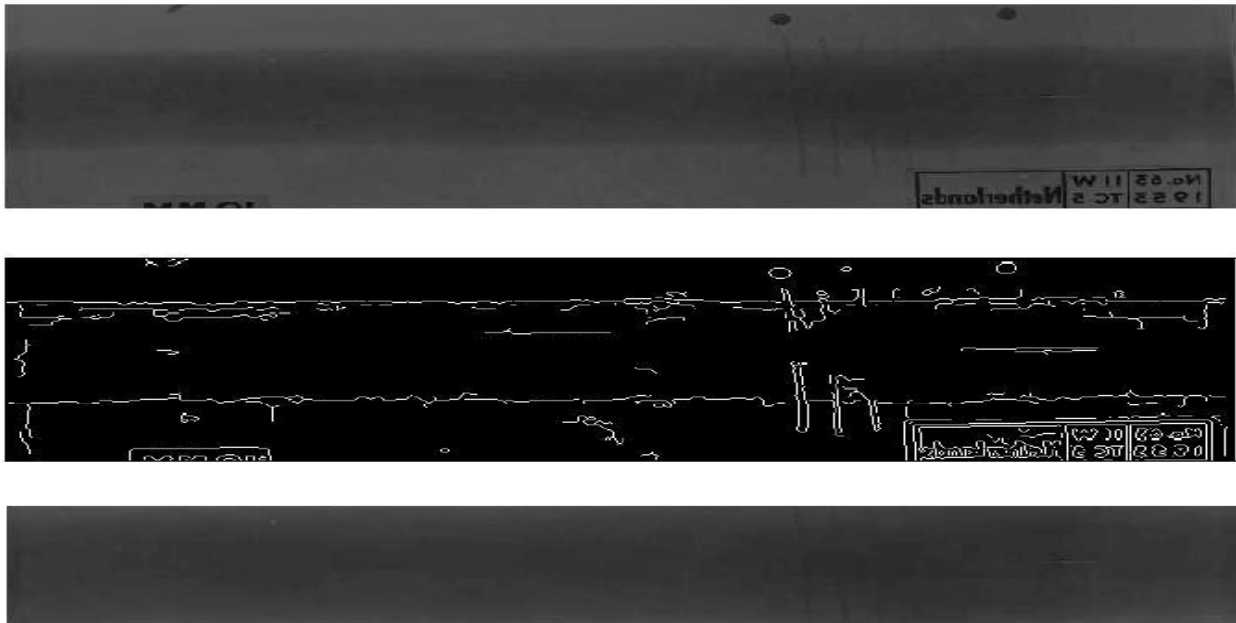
Original, gradient and extracted weld seam image (from top to bottom)
